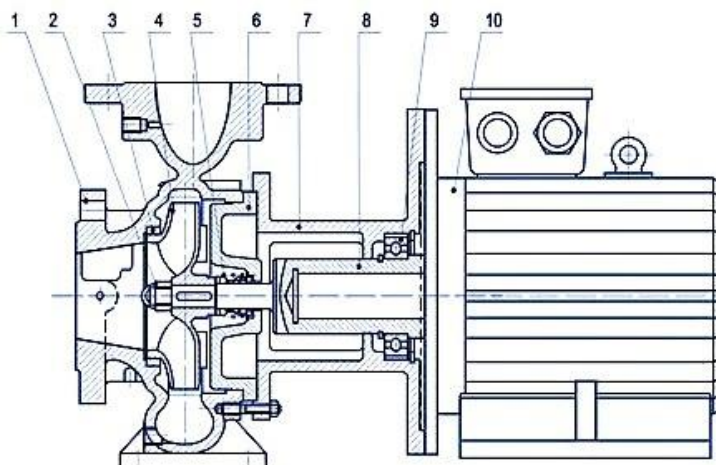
Schematic of a typical close-coupled pump.¹⁶⁹ Although this is not an ACD pump, it is similar and illustrates how the motor shaft can directly turn the pump impeller without an additional pump shaft and bearing.
